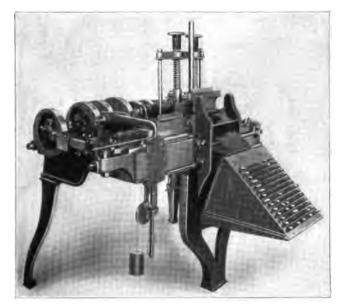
Castotype casting, composing and line-justifying machine. [To face page 374.
